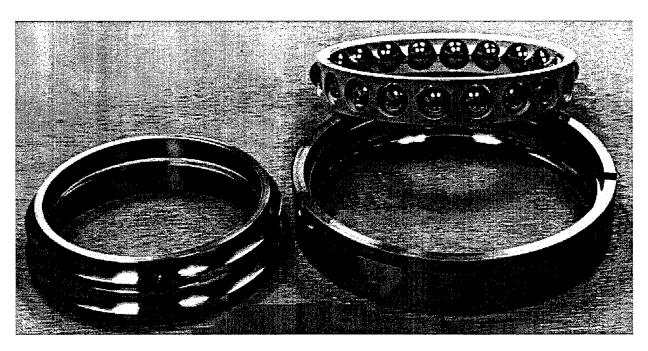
Cronidur 30 "Hybrid" (S/N FCAB0971) – Bearing Pretest Condition
